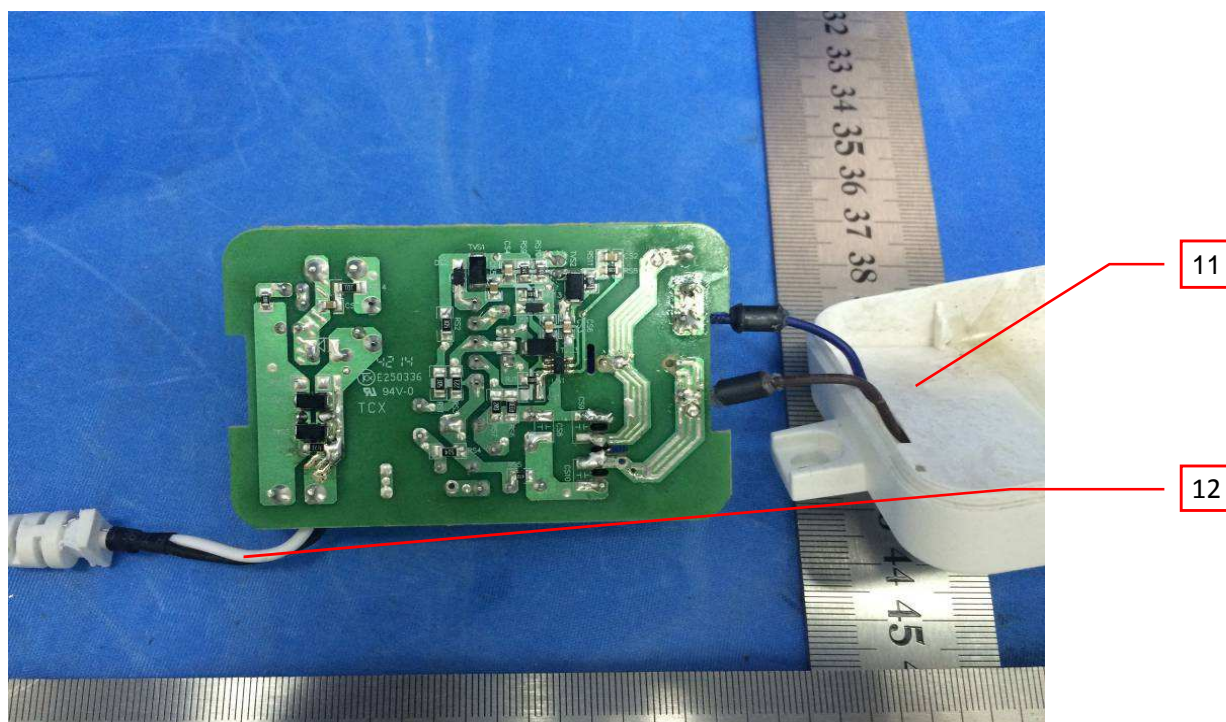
Soldering side view of PCB of model GT-41134-0606-W2-TAB
